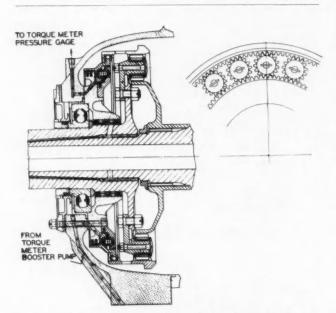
Wright Aeronautical Corp. 20-pinion reduction gear with concentric torque meter
